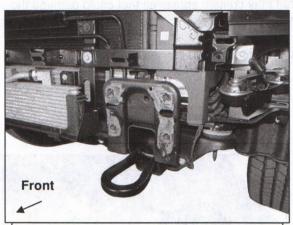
Remove bumper bolts (arrows) to remove bumper (driver/left side pictured from above)
